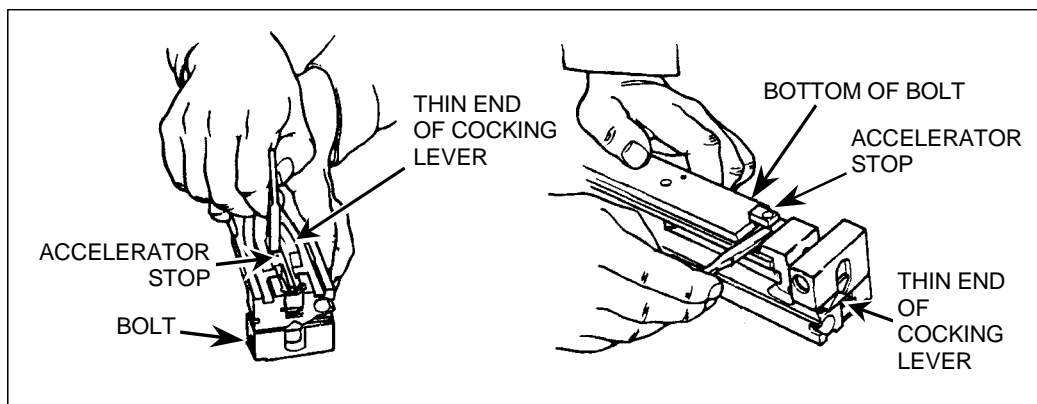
Removal of the cocking lever pin and cocking lever.
